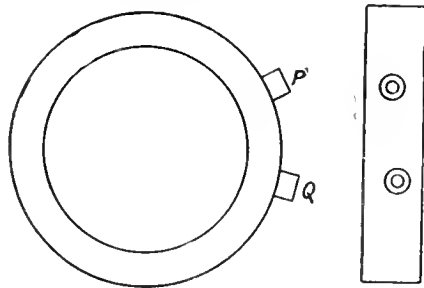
SPECIAL JIG USED FOR DRILLING HOLES IN FRANCIS CUTTER
